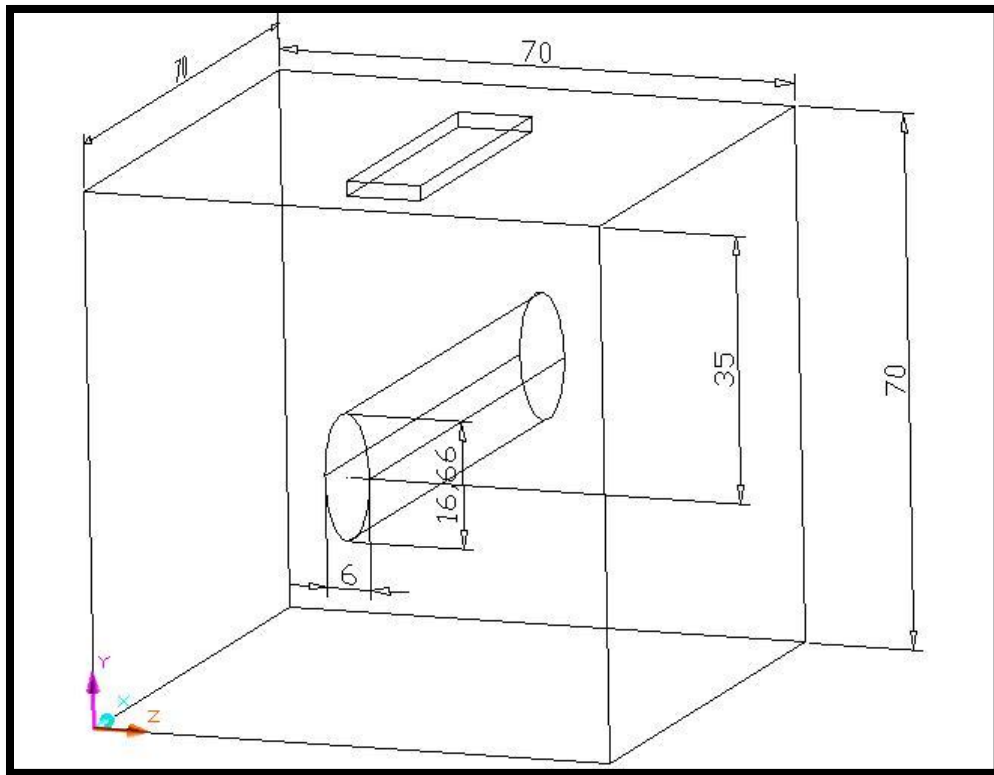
3D view for Dimension of Ellipse Vertical shape cross-sectional cooling channels
